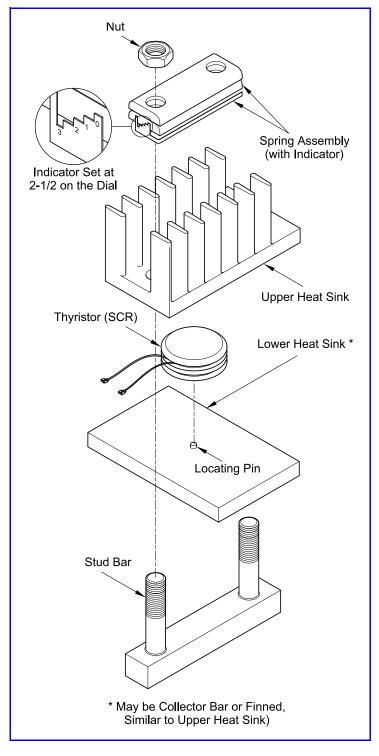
Typical Thyristor Assembly (Showing Indicator Dial)
